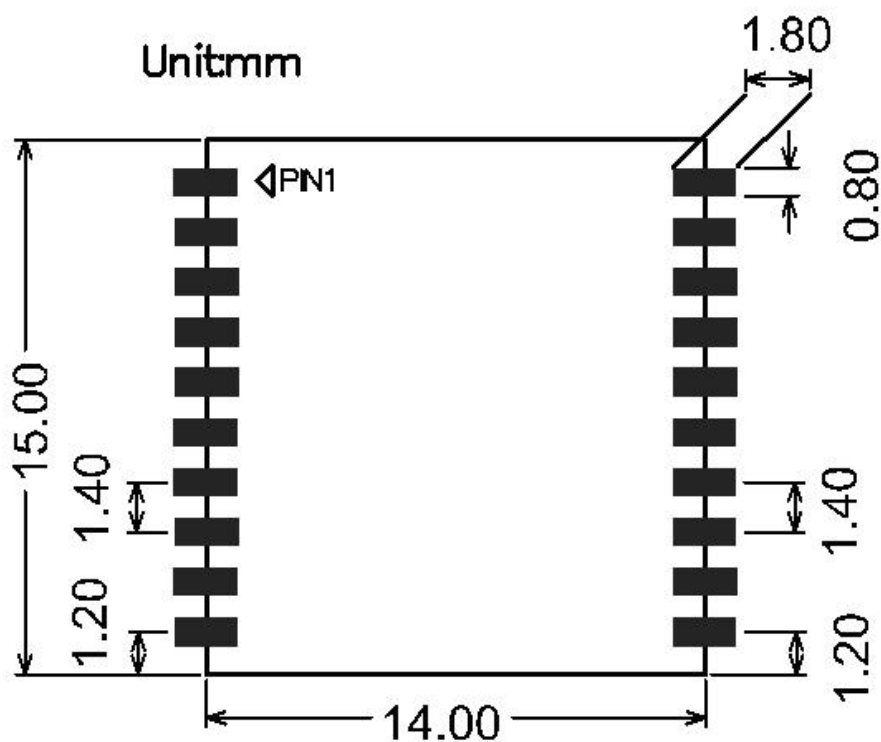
Recommended PCB Footprint of BB2706-HF (TOP View)
